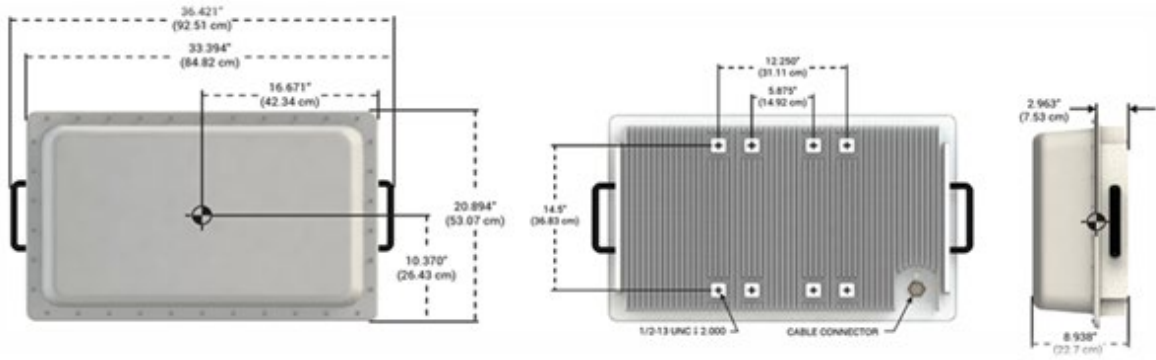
GA-9120 Panel 3-view with Dimensions.
